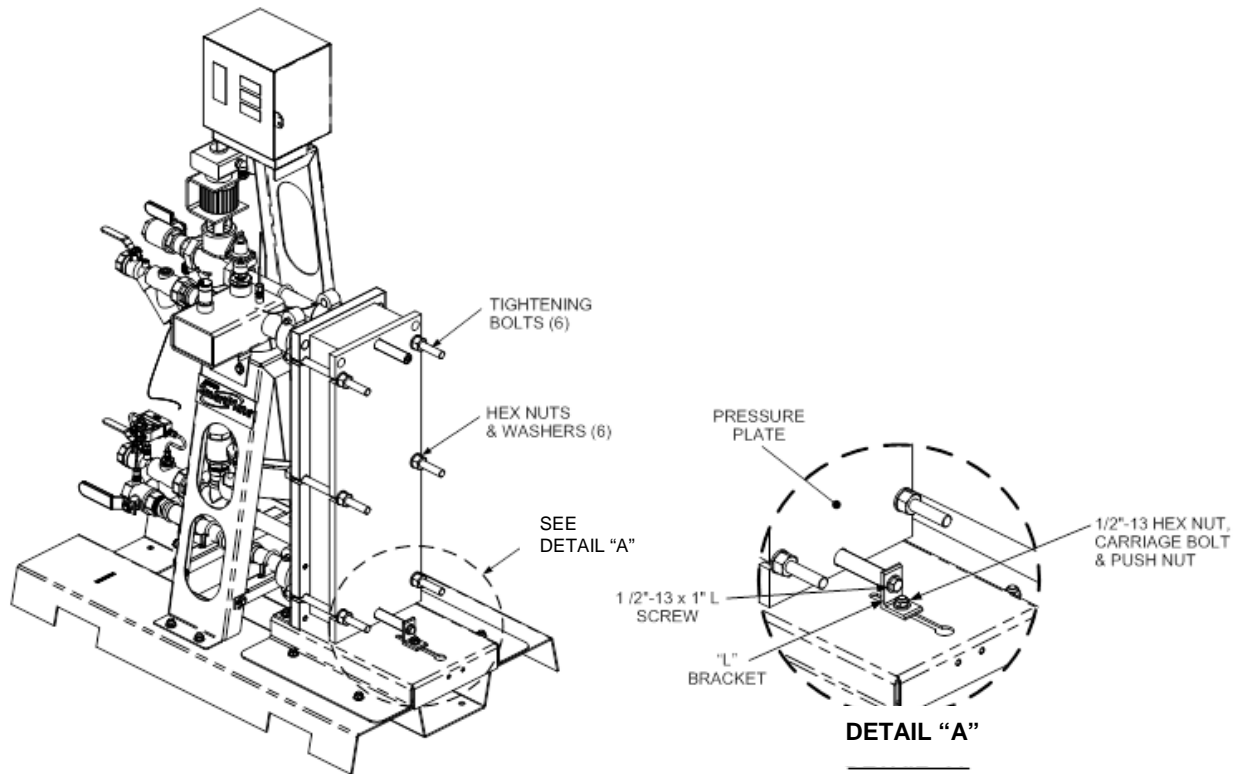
Double-Wall Heat Exchanger Mounting Details - Rear
